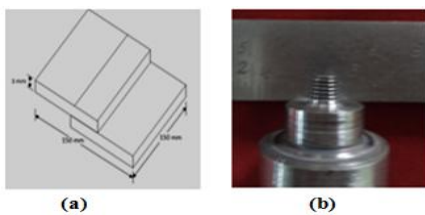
A schematic diagram of FSLW and Fig. 1b. Photograph of fabricated FSW tool
